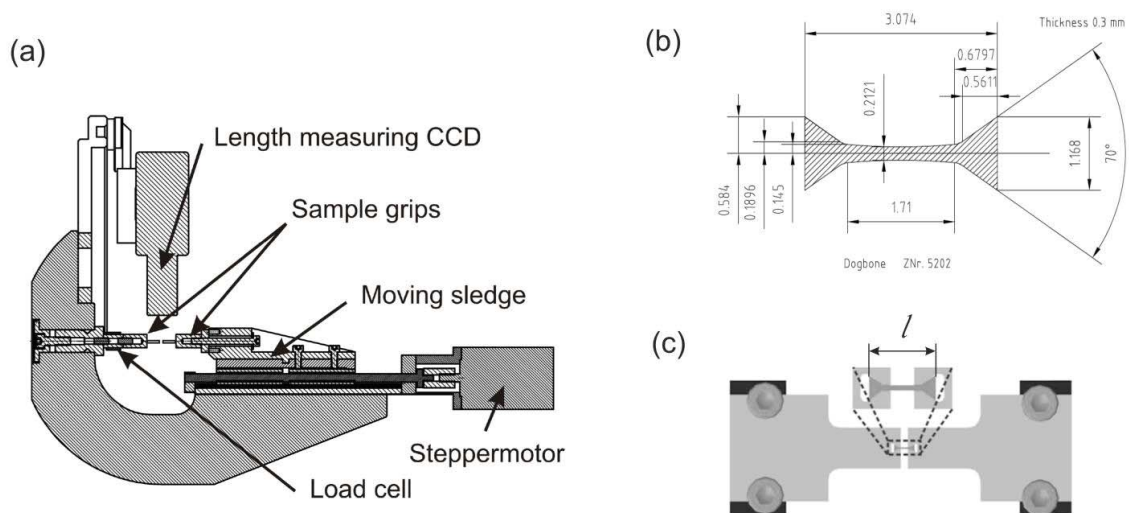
Technical drawings of (a) the micro tensile machine (MTM) [18]. (b) the mini dogbone-shaped tensile test specimen, and (c) the specimen grips [124].
